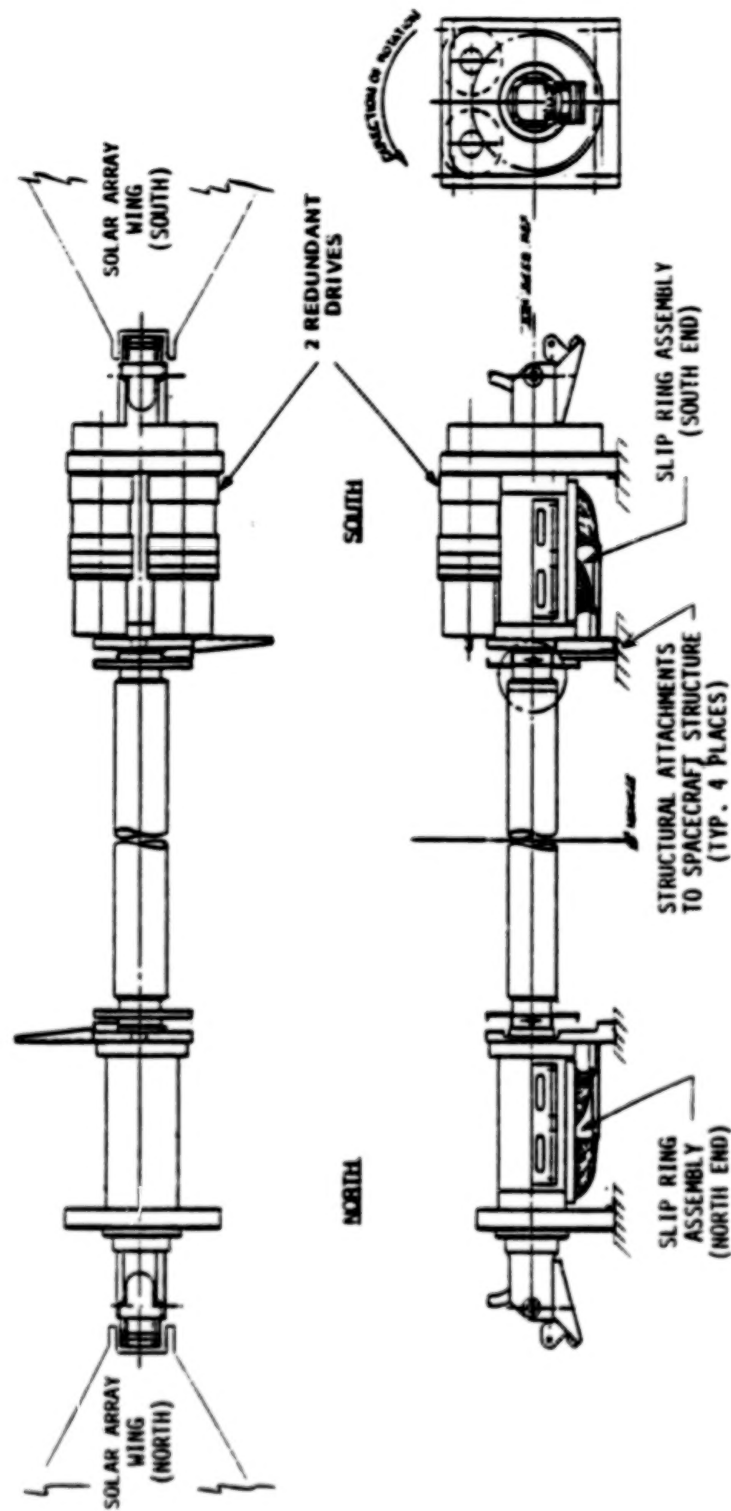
Solar Array Drive and Power Transfer Assembly (SADAPTA)
